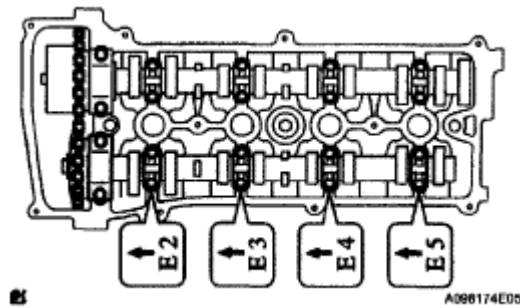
Identifying Marks On Bearing Caps Onto Cylinder Head
